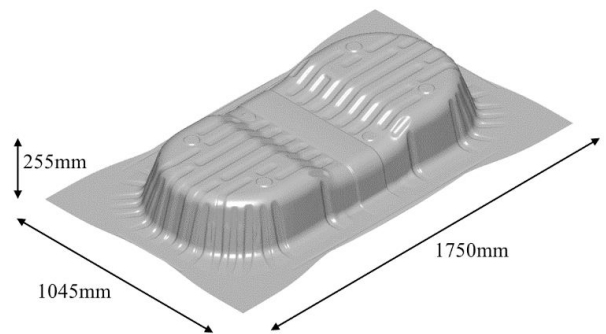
Impression of the Opel Insignia B's spare wheel well; a double part with a relatively high drawing depth.
